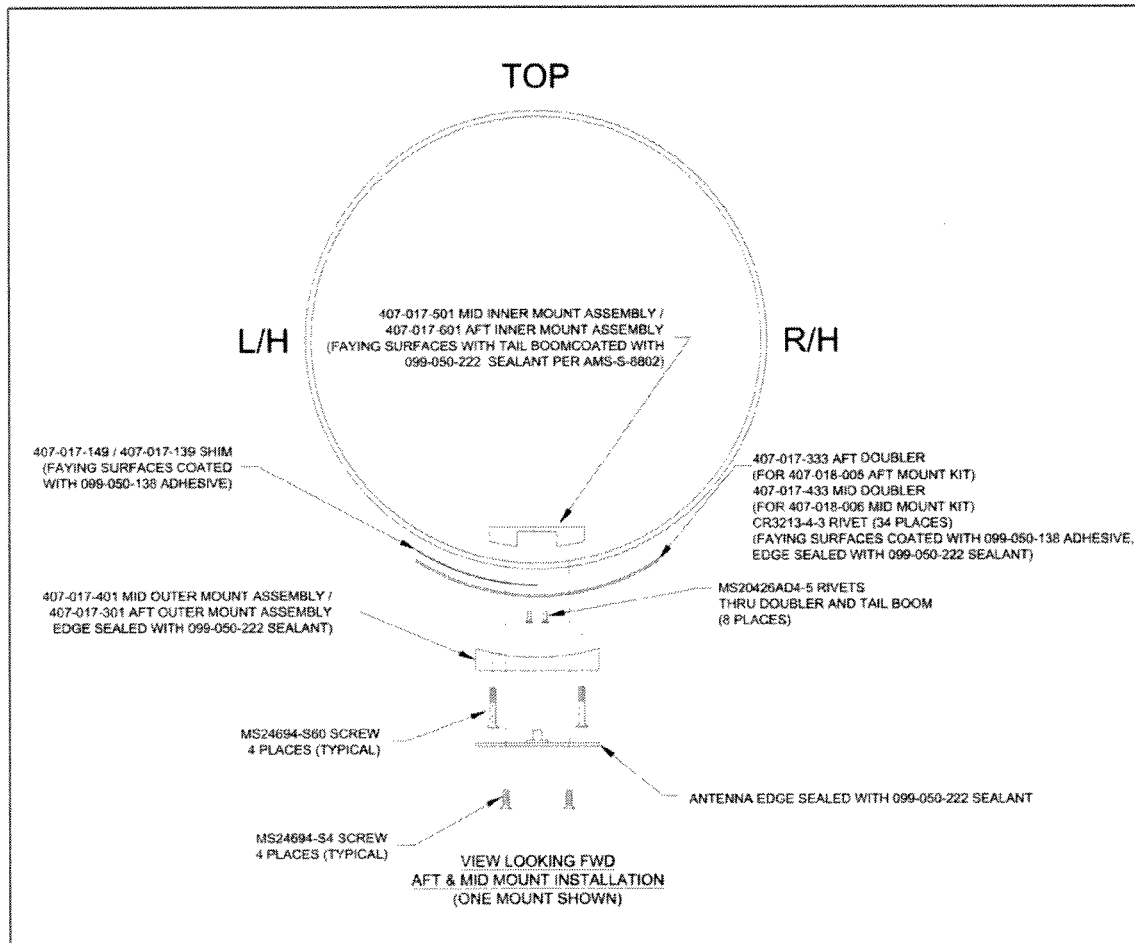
407-018-005 / 407-018-006 KIT CROSS SECTIONAL VIEW
